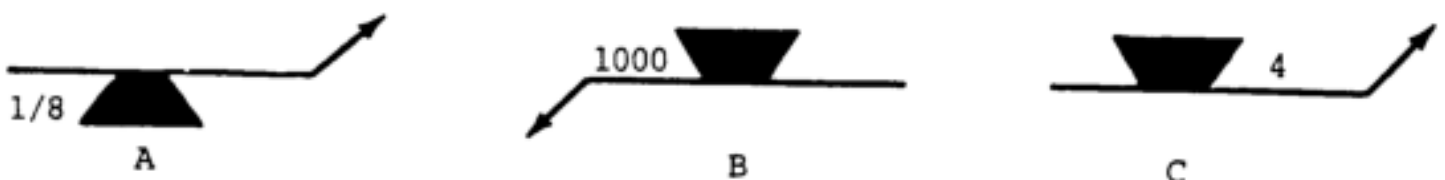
Dimensions of arc spot and arc seam welds.
